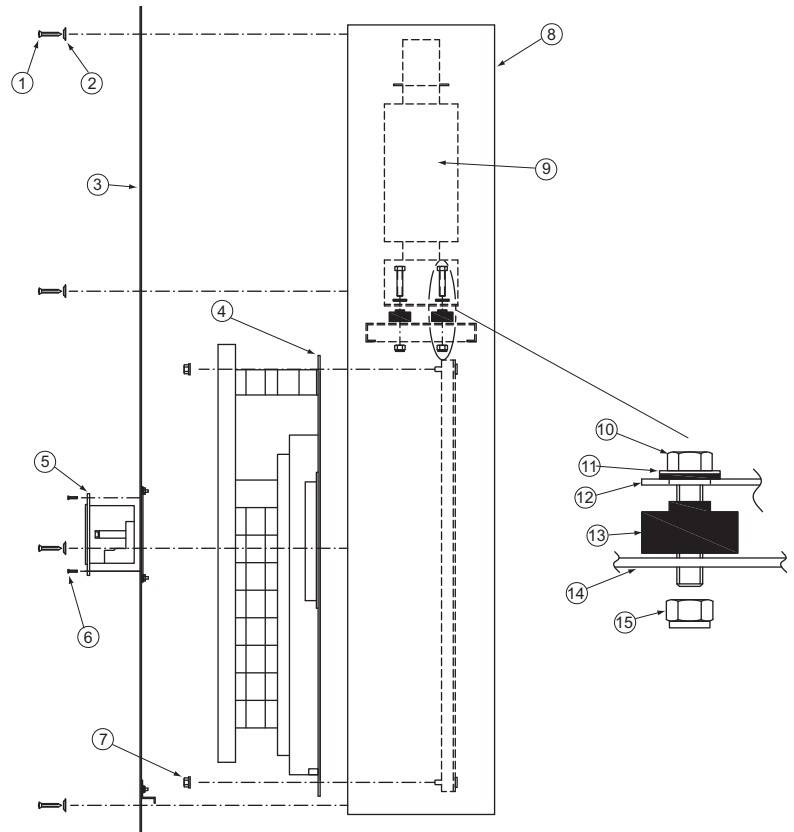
show panel assembly details. Locate the drawing applicable to the size and type of panel being installed.
